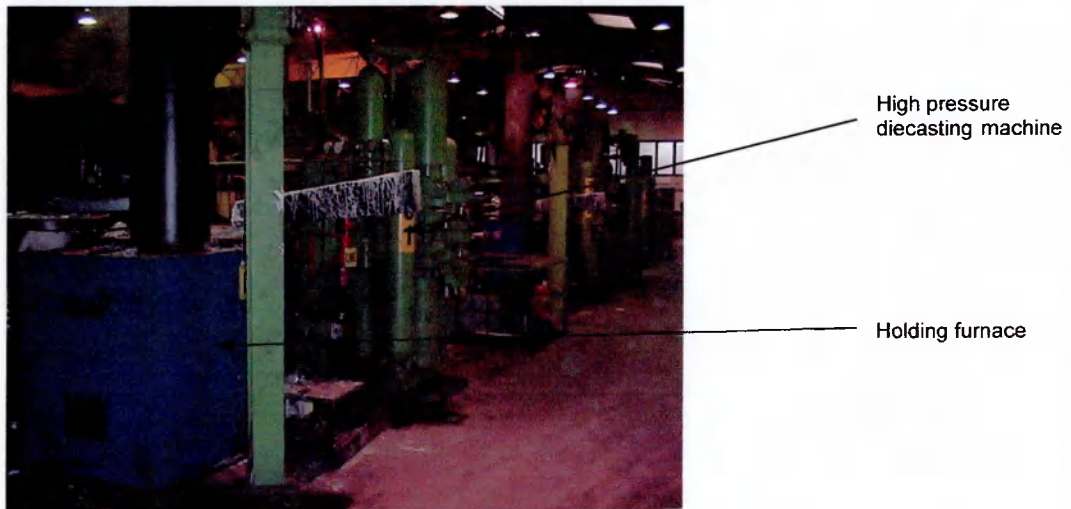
Arrangement of 700 t high pressure diecasting machines & holding furnaces at Foundry C.
